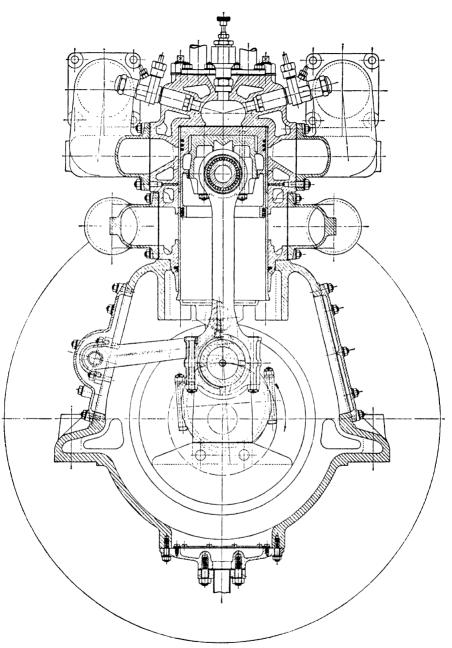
Cross-sectional arrangement of high-speed two-stroke compressionignition engine, bore 5·10 in.  $\times$  stroke 6·50 in., type E54
